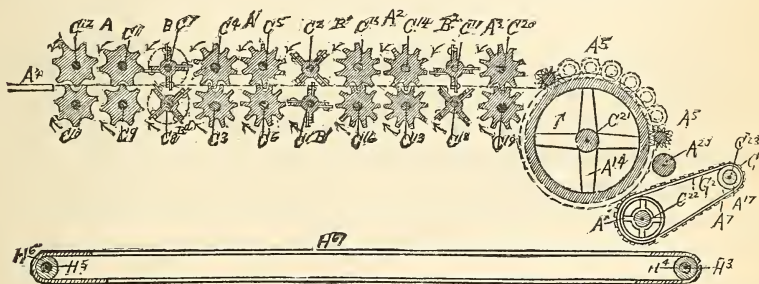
Arrangement of breaking rollers in the Hartshorn machine.
